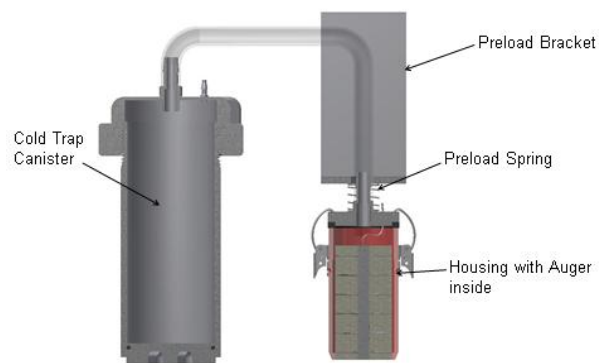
Section view of reactor assembly and cold trap canister & auger.
